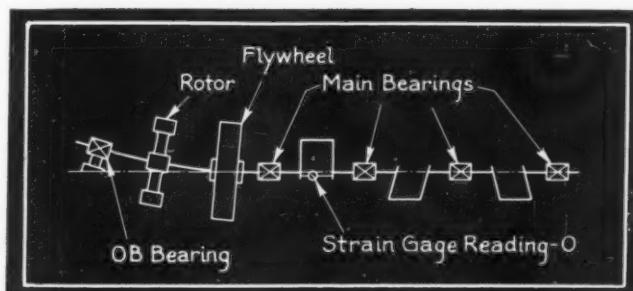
Single outboard bearing and extension shaft where alignment is obtained by raising outboard bearing until strain gage shows no distortion
